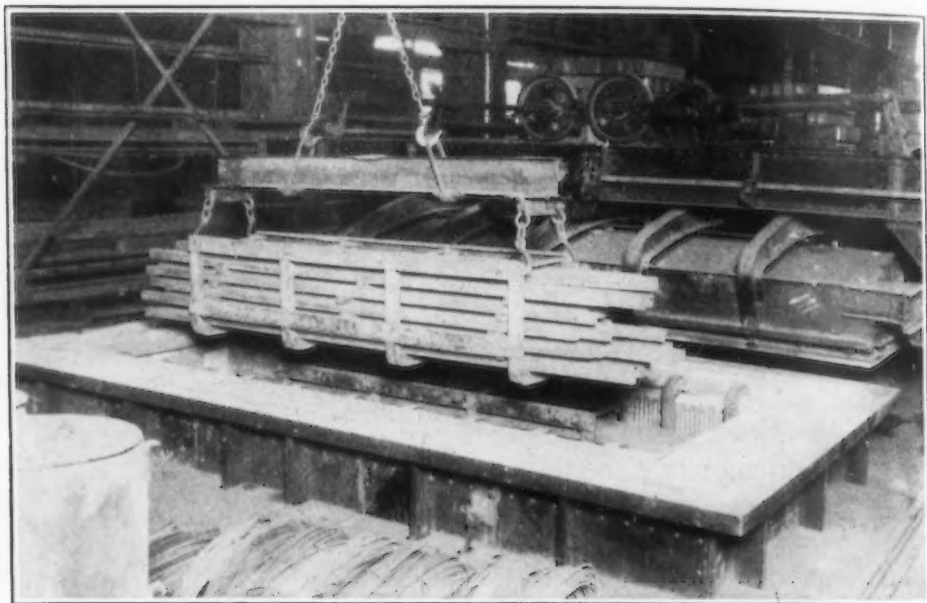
Pit-type Furnace for Annealing Roller Bearing Stock.
